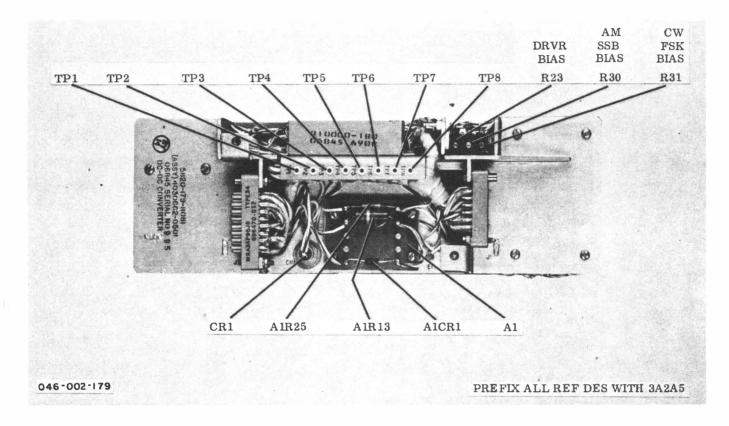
DC-to-DC Converter Assembly 3A2A5 Top View, Component Location
